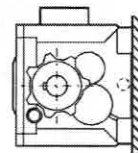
Mounting positions for helical gearbox D/Z foot-mounted design, sizes 19 - 29
